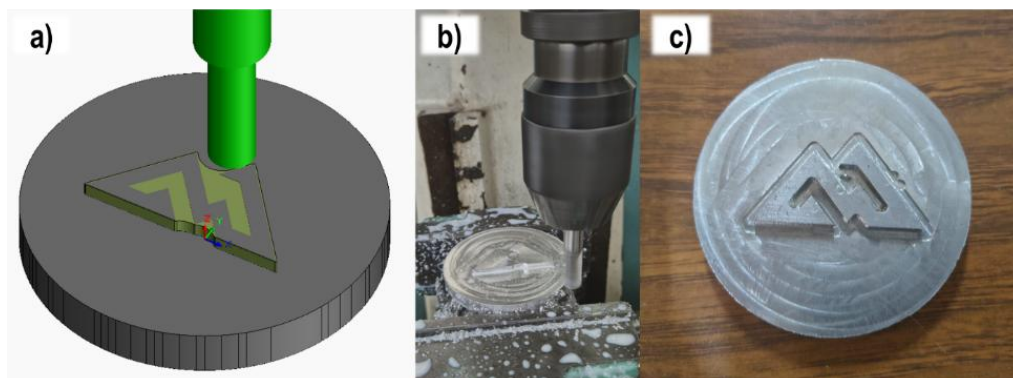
Stamp manufacturing process: a) Machining simulation in SolidWorks CAM, b) Stamp machining, c) Final product.
